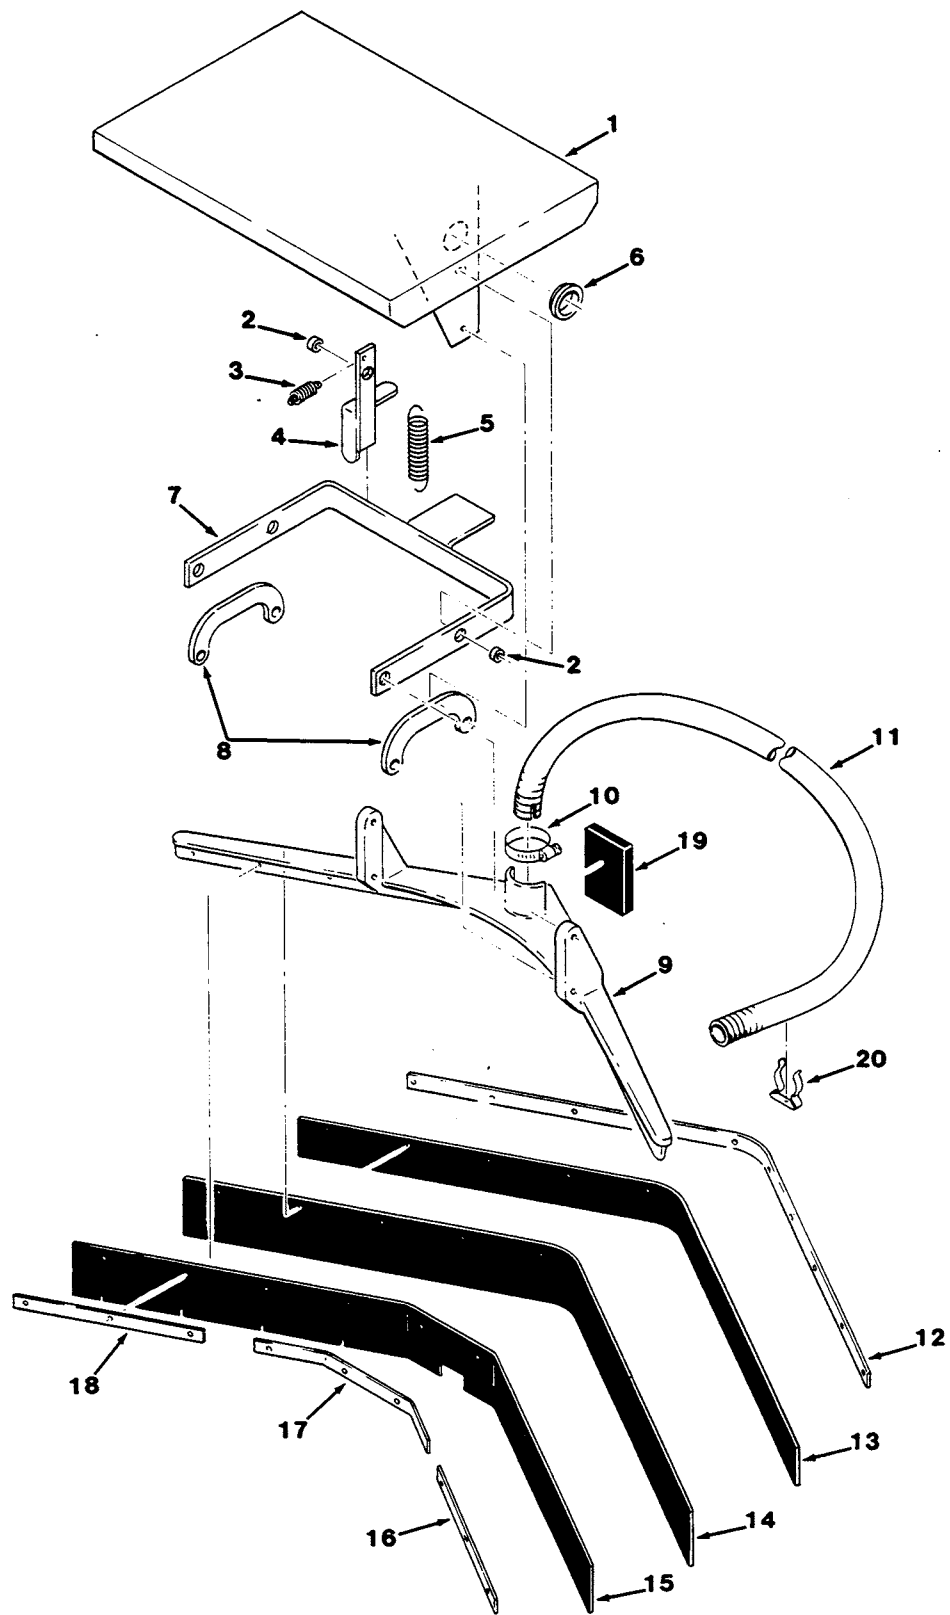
REAR SQUEEGEE ASSEMBLY
